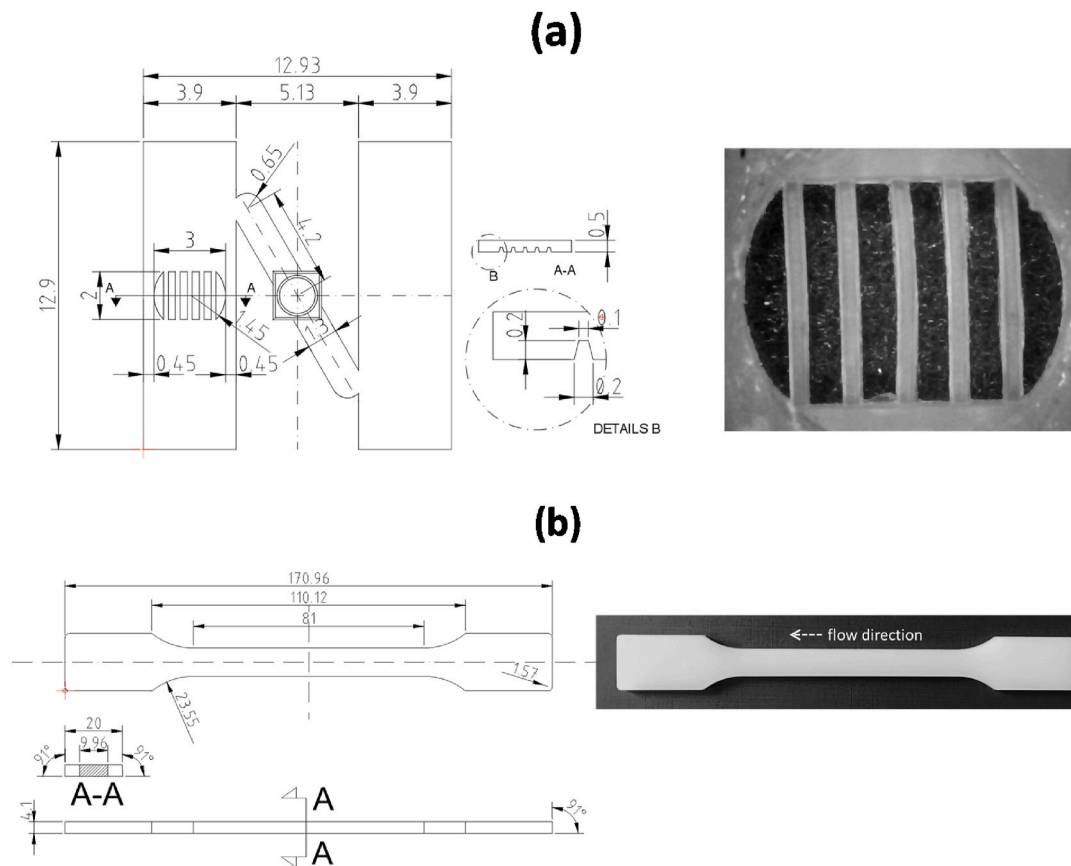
Mold drawing and part photo of (a) the micro-part and (b) the macro-part. In (b), the drawing of one single cavity is reported. Dimensions are in mm.
